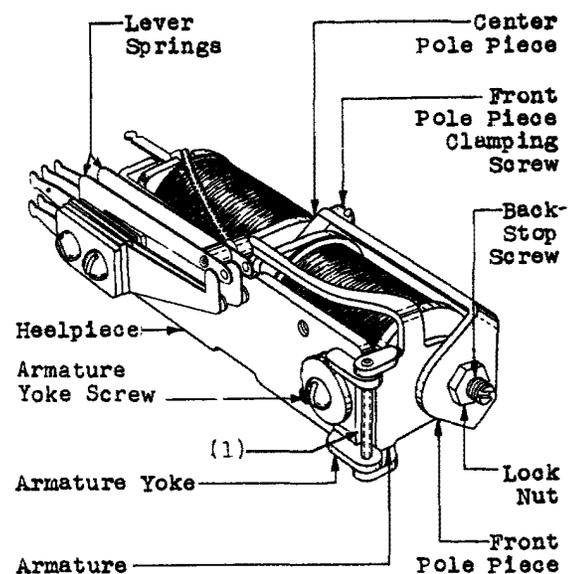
Fig. I - Heelpiece Airgap Requirement — 251-Type Relay Shown
